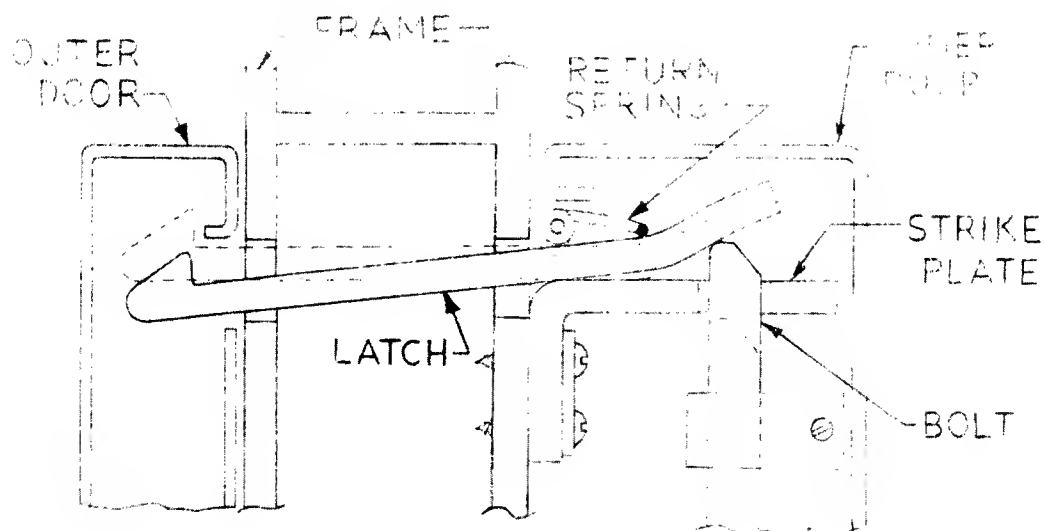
Side View of a Section of Schlage Door (Model no. 1) Showing Inner Door Security Mechanism
